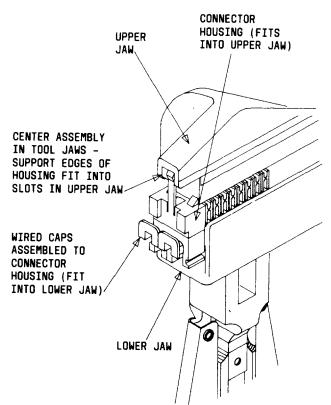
Connector Placed in R-4857 (Amp No. 266186-1) Cap Setting Tool
